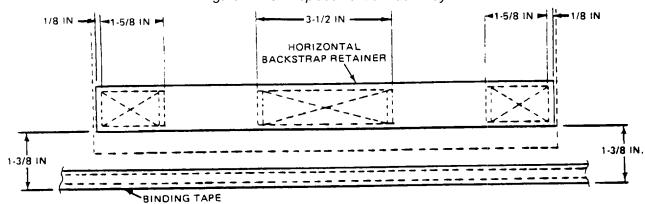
Installation of Horizontal Backstrap Retainer.
